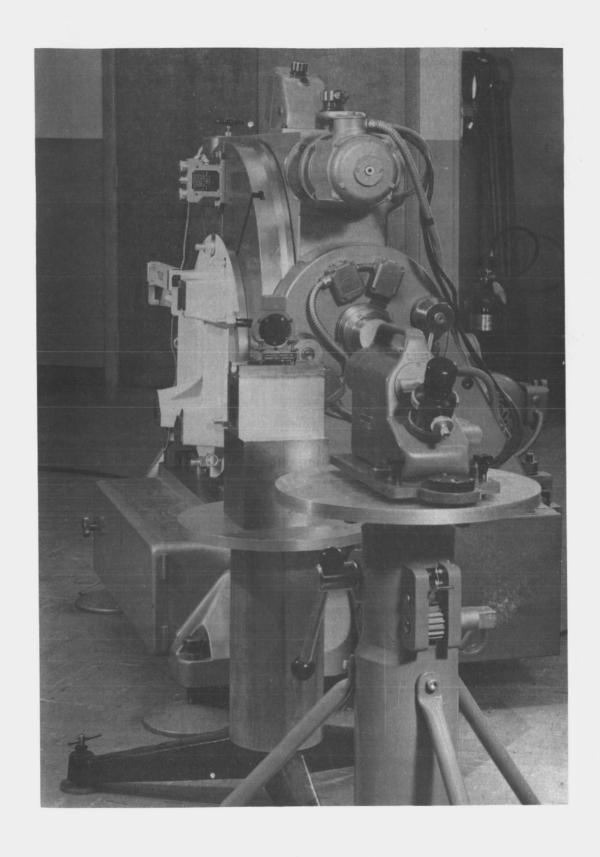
Measuring IMU fixture axis alignment to table - top axes about Z (JDC 0012).
